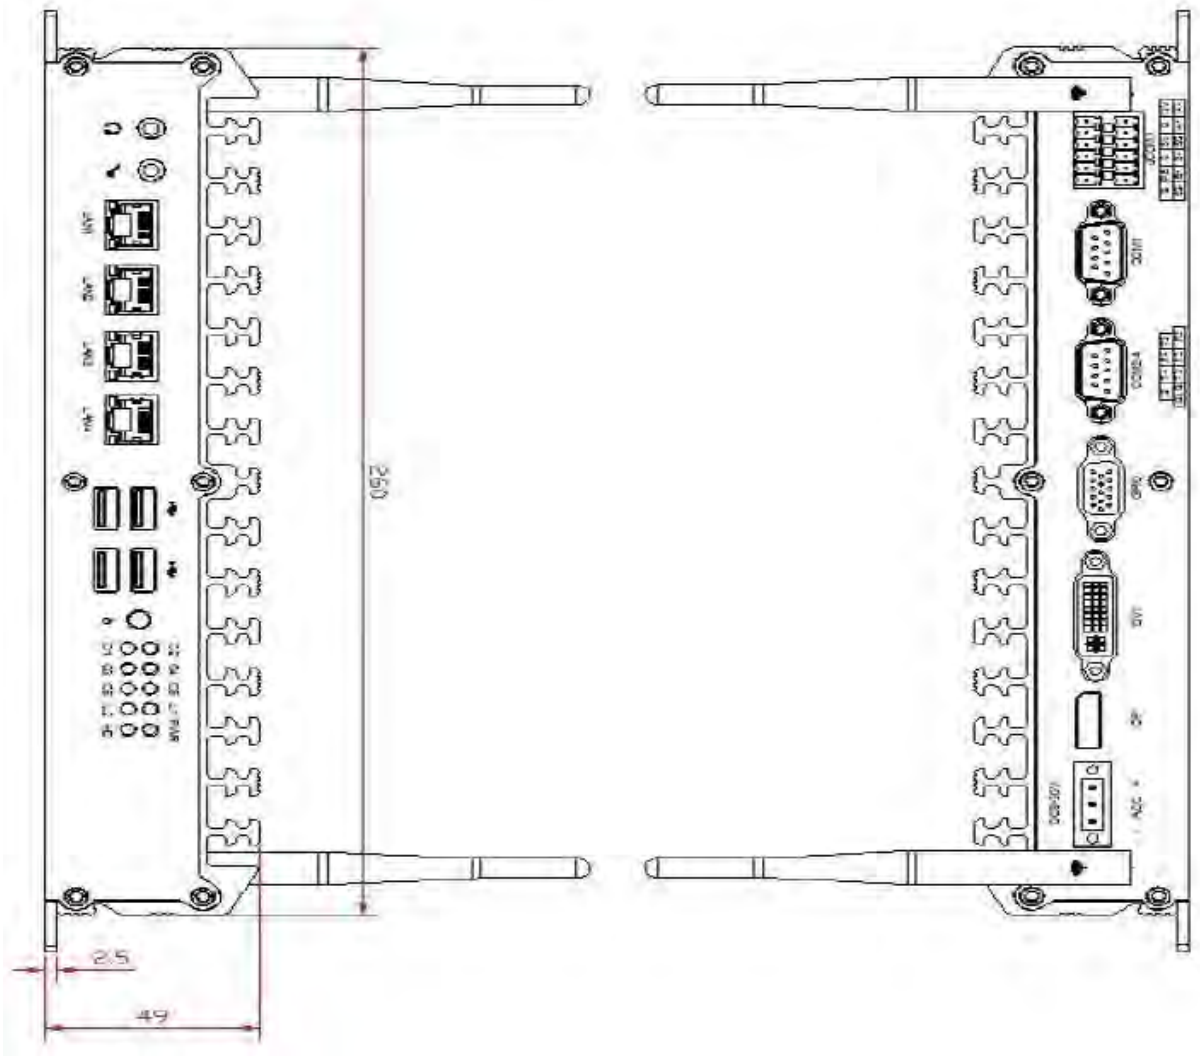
IFC-BOX4000 mechanical dimension drawing
